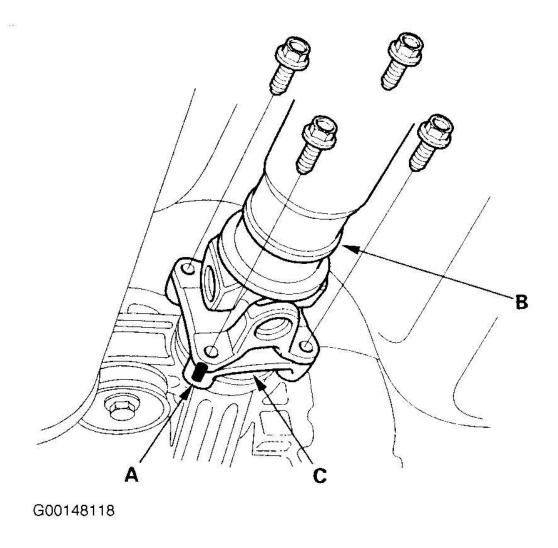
Marking Driveshaft & Rear Differential Companion Flange Courtesy of AMERICAN HONDA MOTOR CO., INC.
